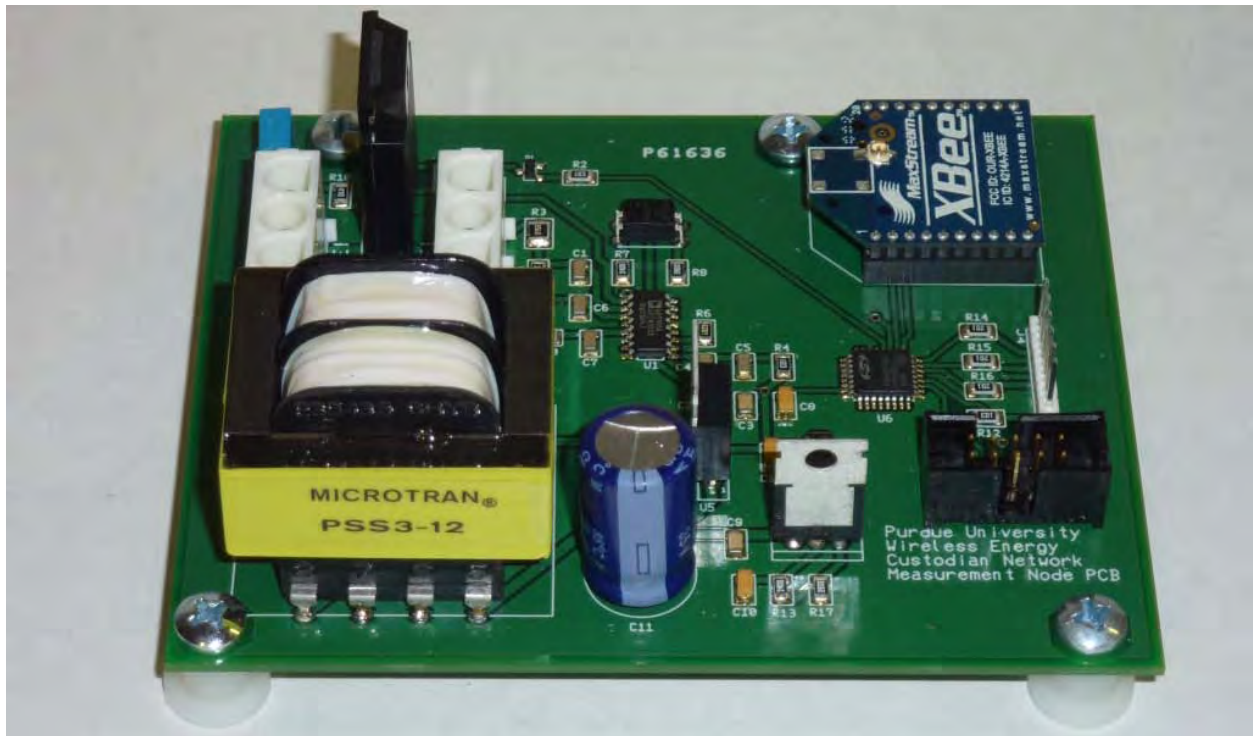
Photograph of the Measurement Node circuit board after assembly.
